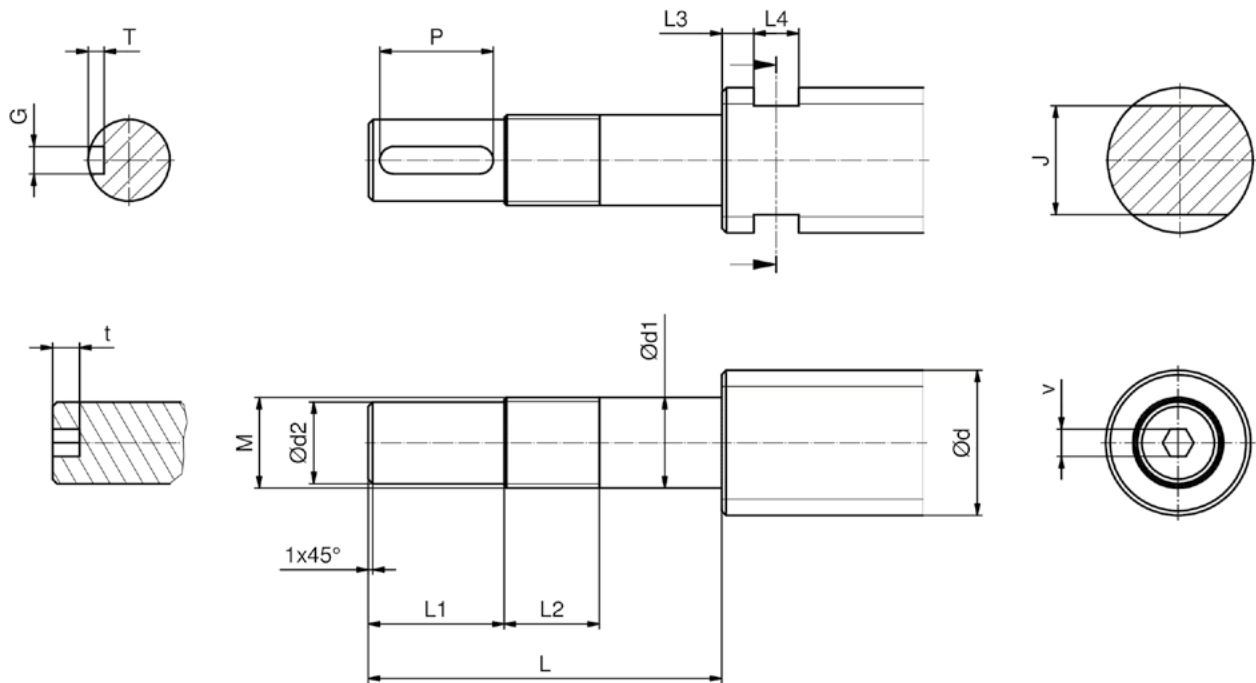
Dimension standard end machining for BST bearings and BSTK bearing units
